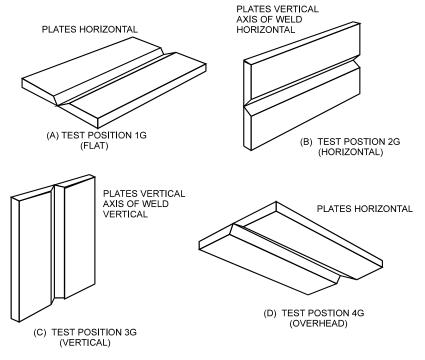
Position of Test Plates for Groove Welds (see 4.2.5)
